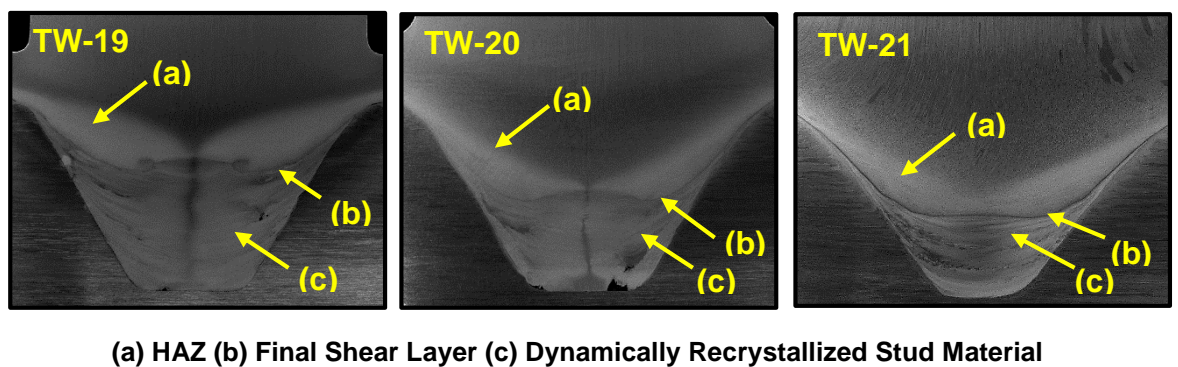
Welds TW-19 to TW-21 Macrographs
